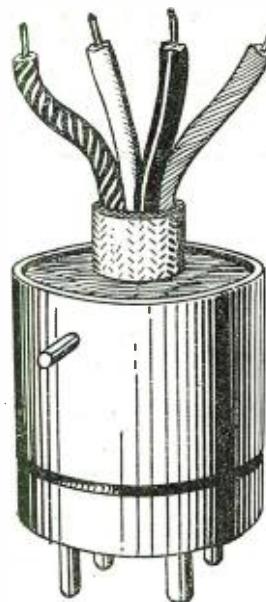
A discarded electron tube base may be used for a battery switch by soldering leads having different-colored insulation to the prongs.
